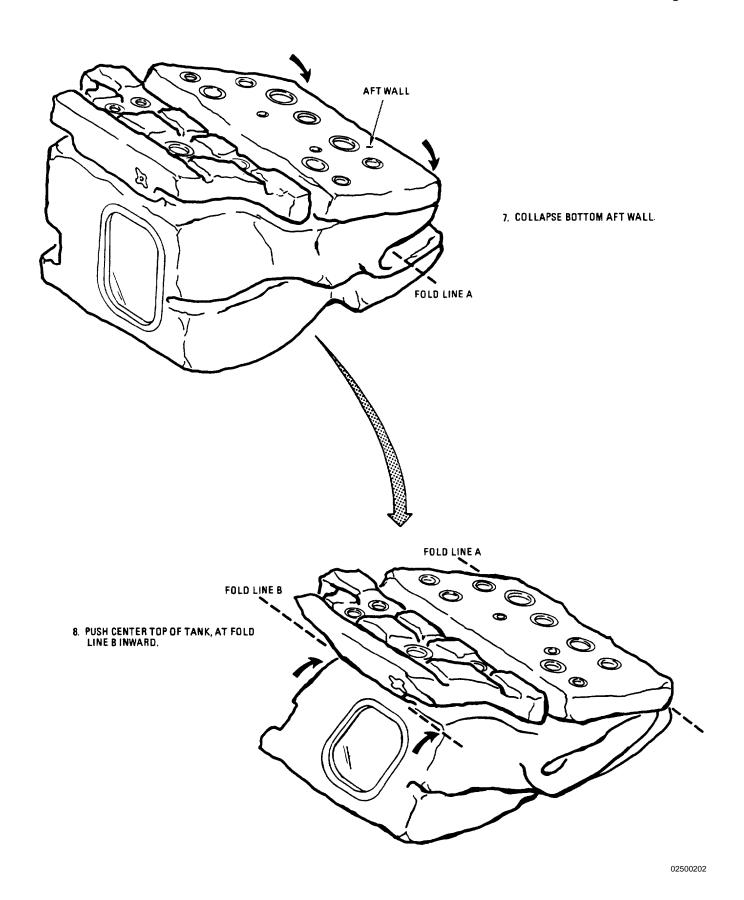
Installation - No. 3 Fuel Tank Folding (Sheet 2)
